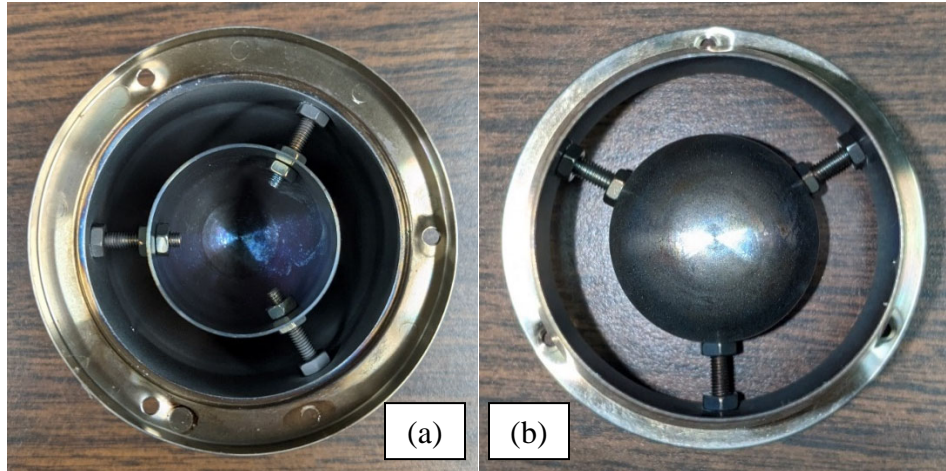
Front/inner view (a) and rear/outer view (b) of nozzle
